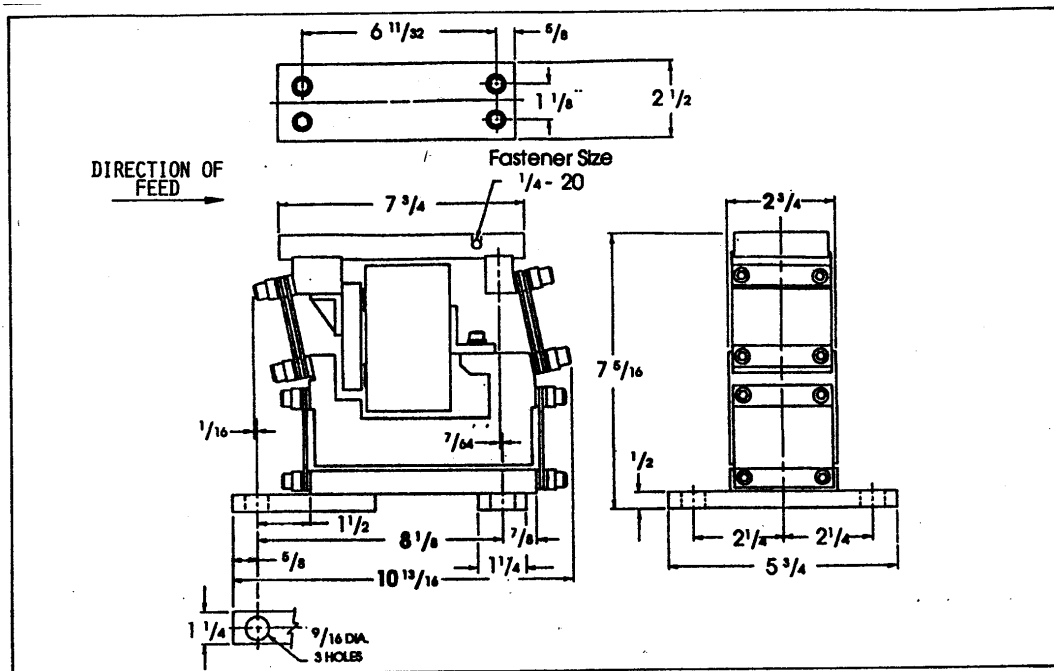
LD-4 OUTLINE DIMENSIONS
